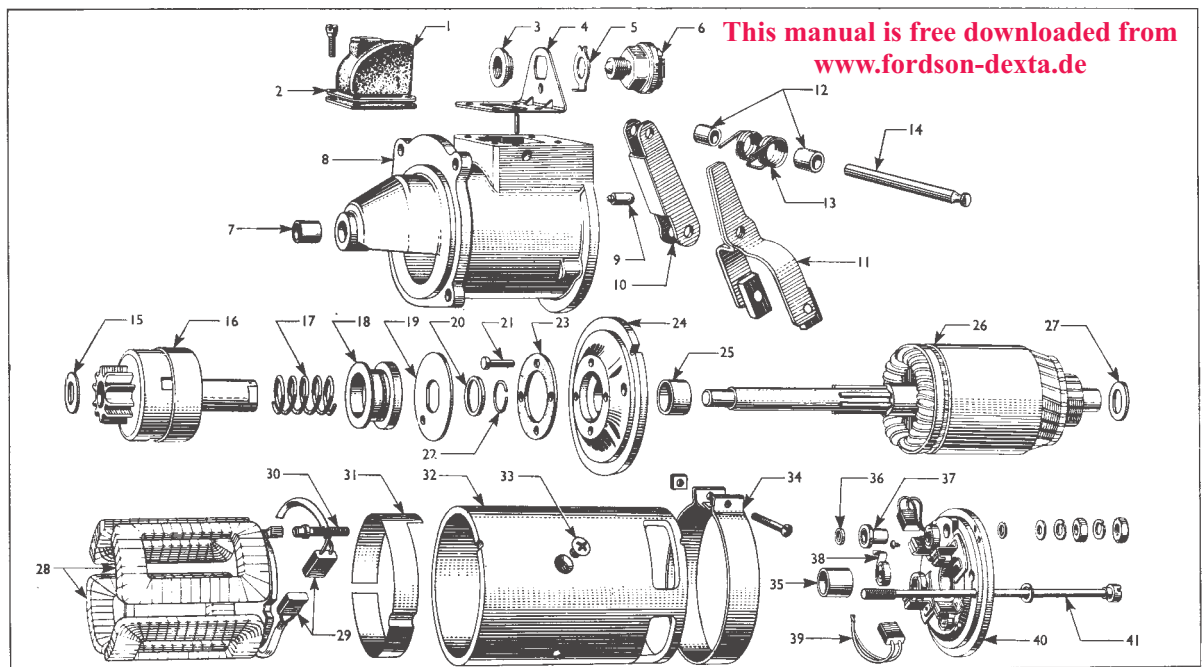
Exploded View of Starter Motor, Drive and Controls
